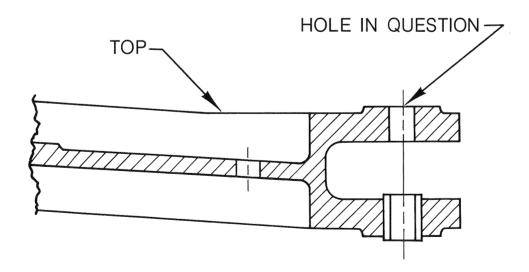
269A6042 Bellcrank Assembly Segment
